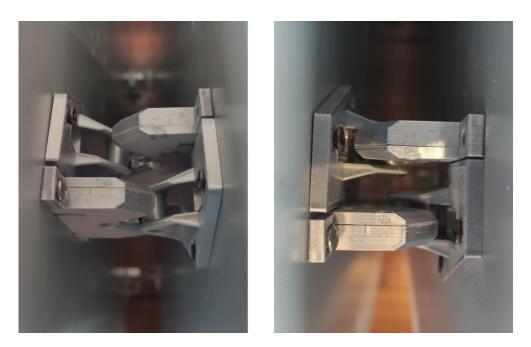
Coupler test 1:3 scale module - double drive module coupler engagement
